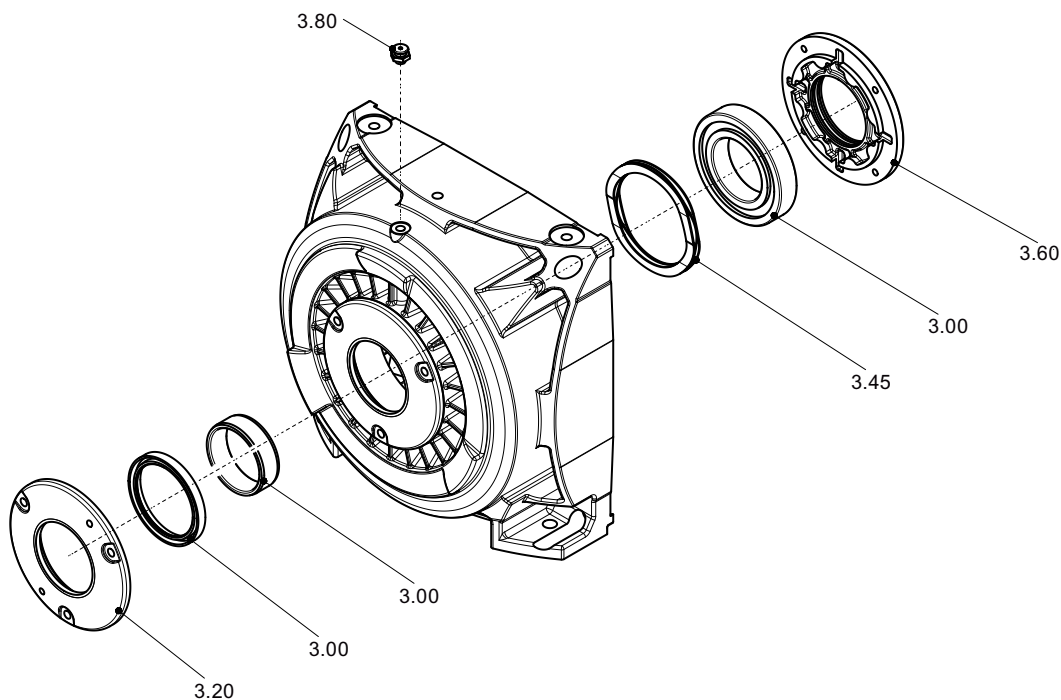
Rolling-contact bearing bush drive end with mounted gearing, with regreasing
